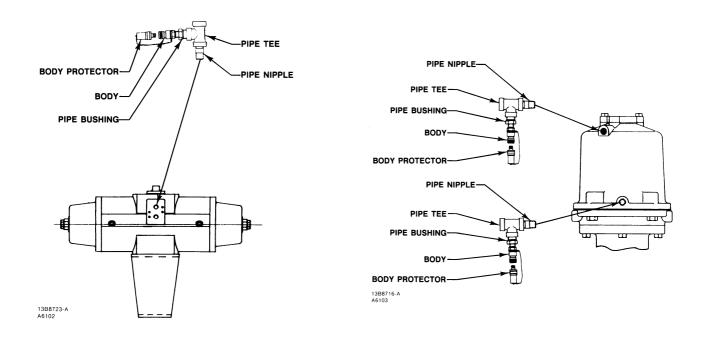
Type 1032 Rack-and-Pinion Rotary Actuator (Spring-Return)
